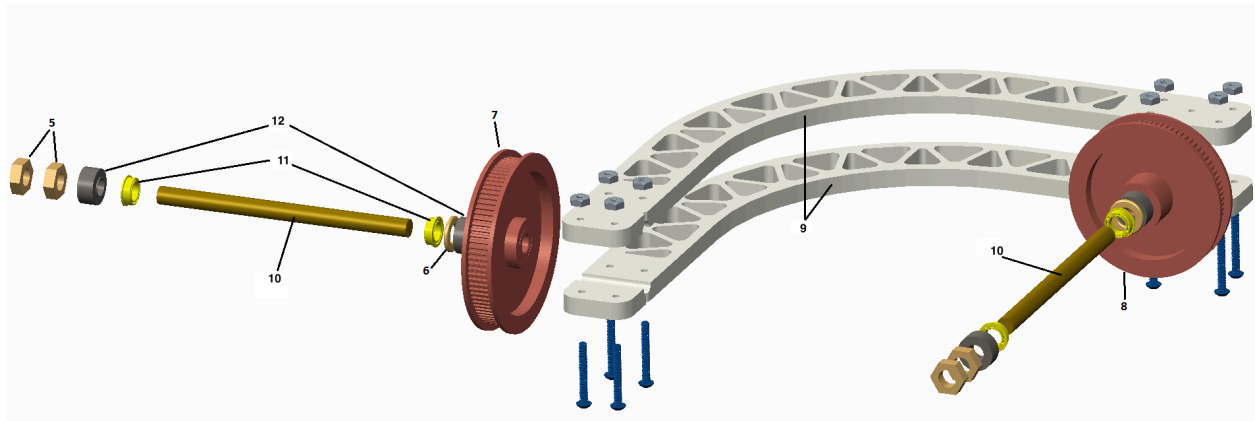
Link 1 with exploded view. Technical drawings for labeled components are provided in Appendix A.
